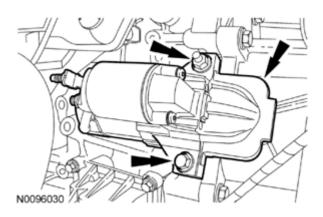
Locating Starter With Bolts And Studs Courtesy of FORD MOTOR CO.
